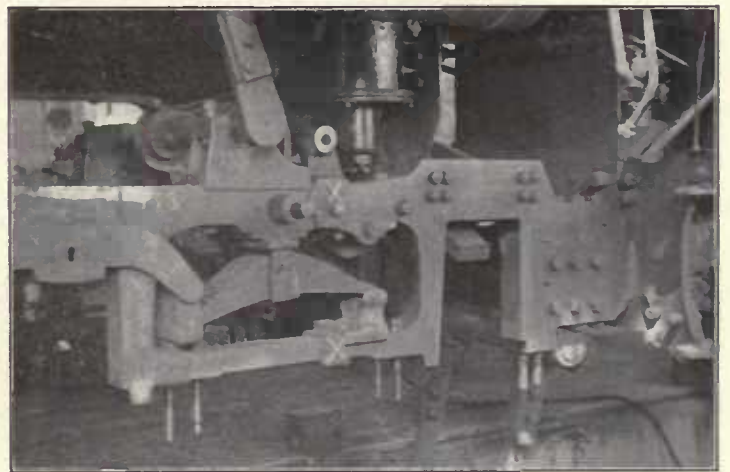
Steel Section Welded to Frame with Thermit.
